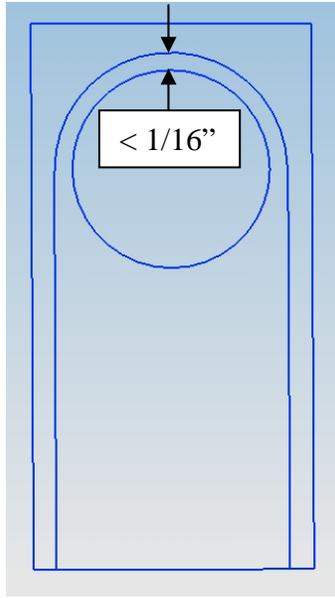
Side view of Co-Sleeper wall frame inside slider housing with included tolerance.
